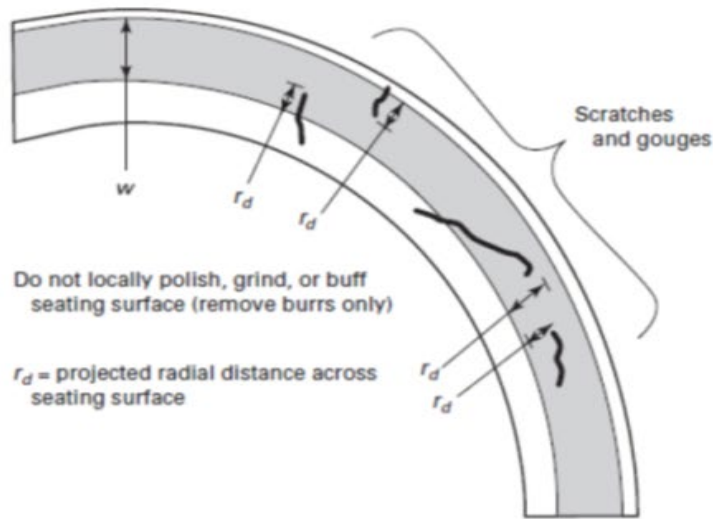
Flange Surface Damage Assessment: Scratches and Gouges
